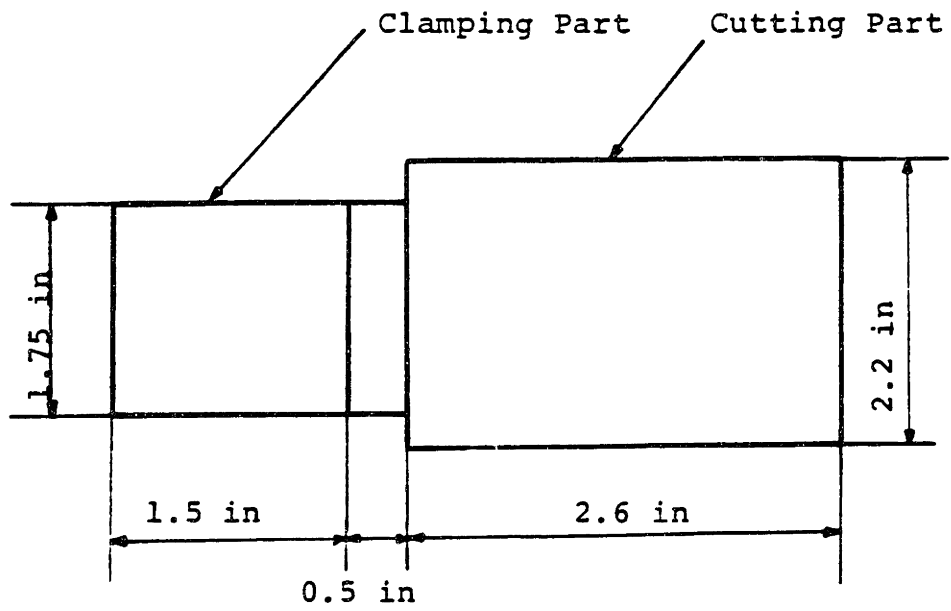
Steel Bar Workpiece Used in the Metal Cutting Test
